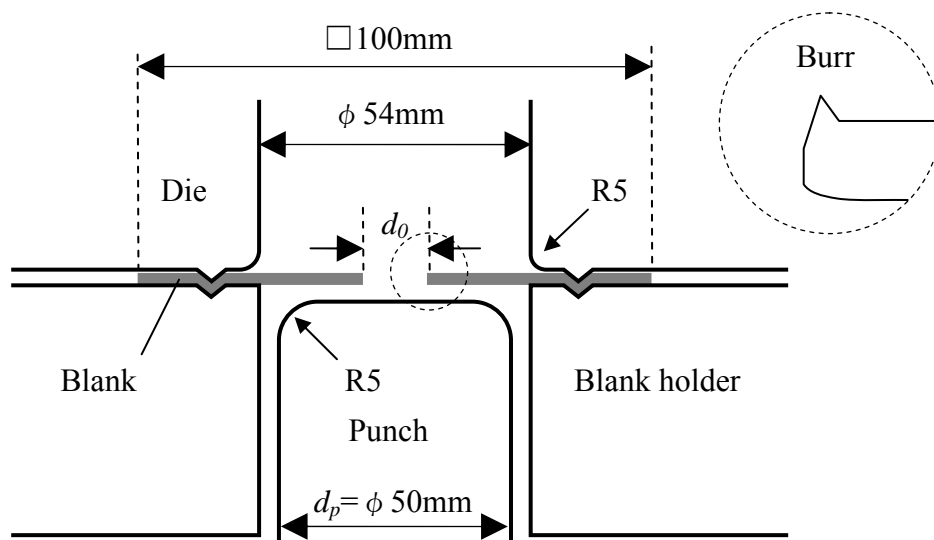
Schematic drawing of geometry for hole expansion test.
